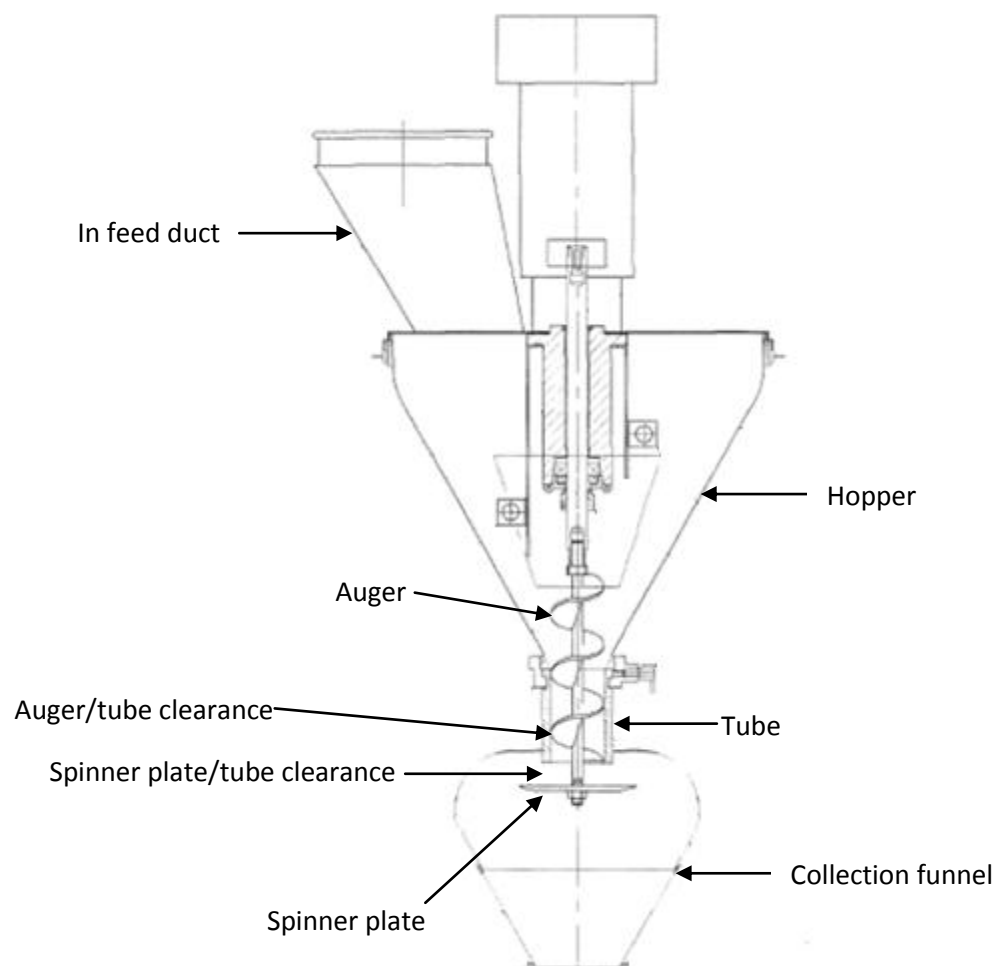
Mateer Burt Co. Inc. Bespoke P&G 1900 Series Auger Filler [4].
